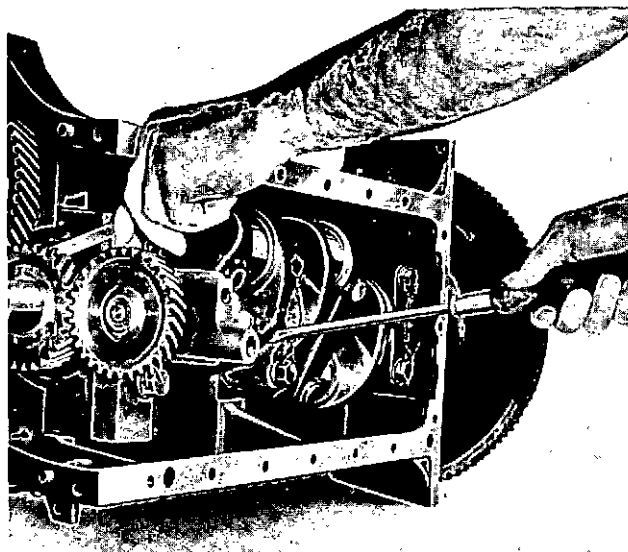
Alternative Method of Checking Crankshaft End Play with Feeler Gauge\
